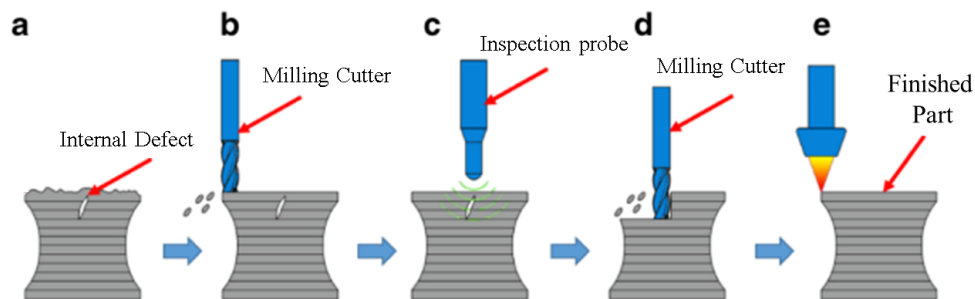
(a): internal defects developed during operation; (b): milling cutter removing surface material; (c): detection of the internal defects; (d): subtractive manufacturing to repair the defects; (e): finish the part with additive manufacturing ⁷².
